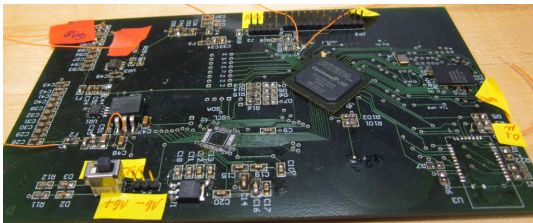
Recently fabricated digital PCB version in the Higgins laboratory.
